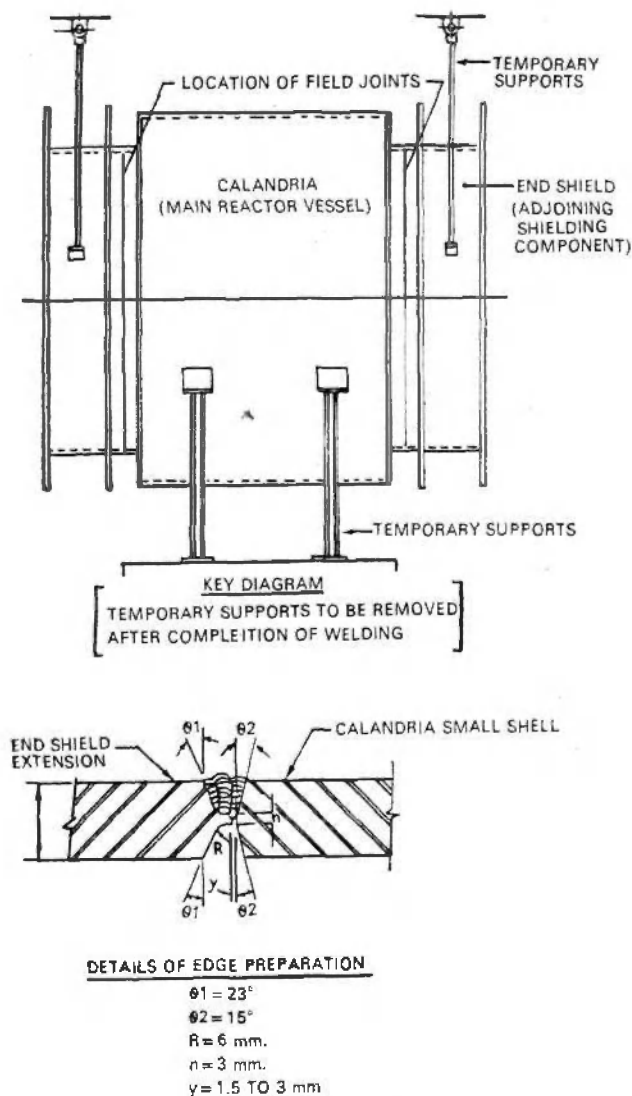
Field welding details for the joint between Calandria small shells and endshield extensions.
